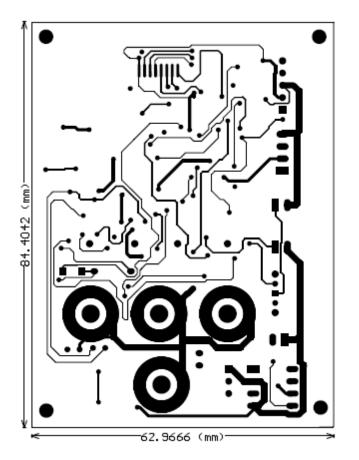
Bottom side of the arm simulator PCB (62.966 mm X 84.402 mm) circuit schematic as given in Figure C.2
